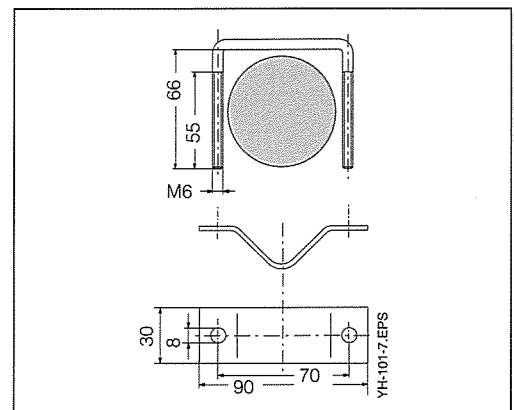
Weather protection cover CYY 101 with dimensions and mounting positions for:
